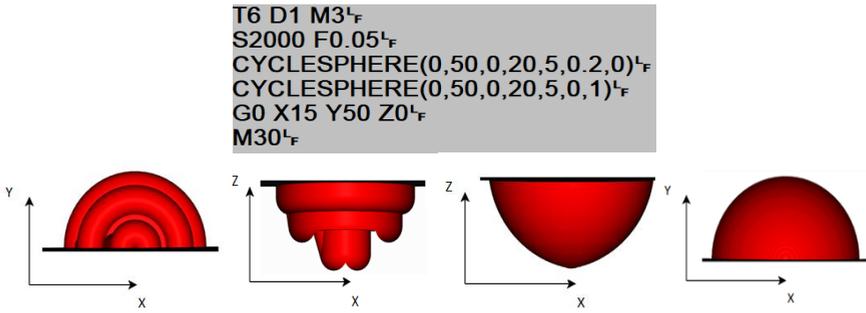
Milling of sphere-shaped pocket – roughing and finishing.
